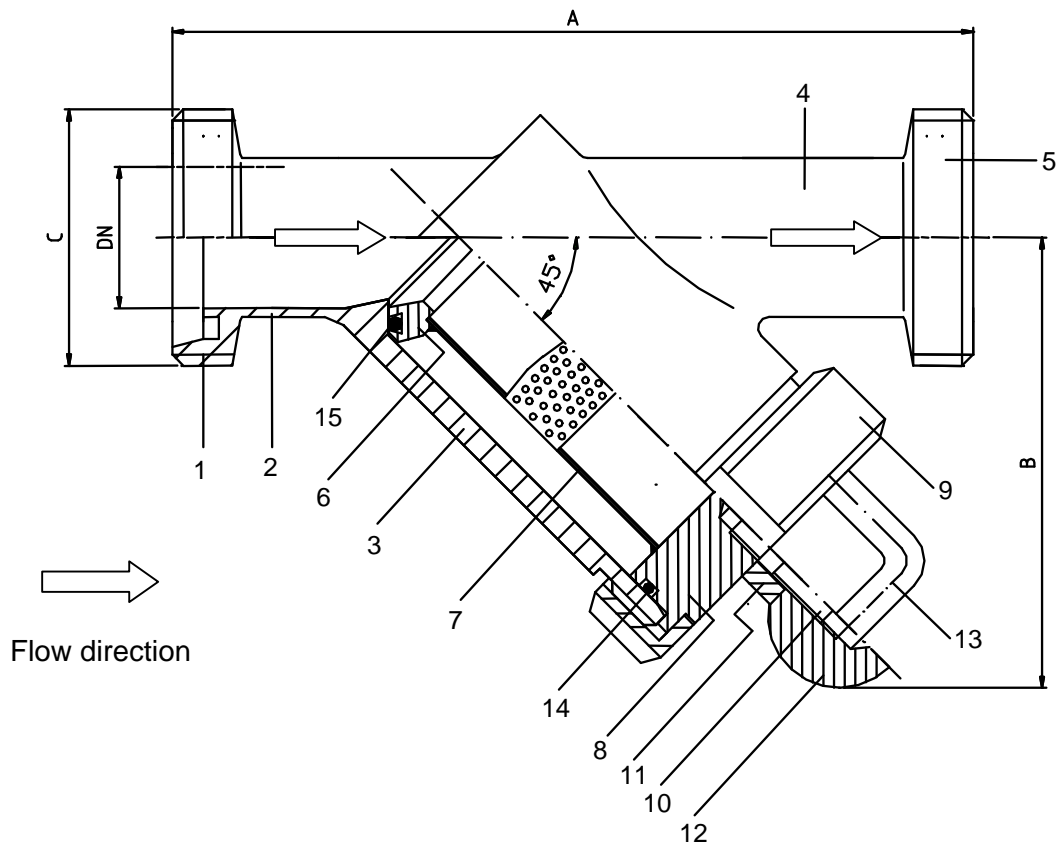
Sectional view of dirt collecting filter DIN GG (dimensions see chapter 10.1)
